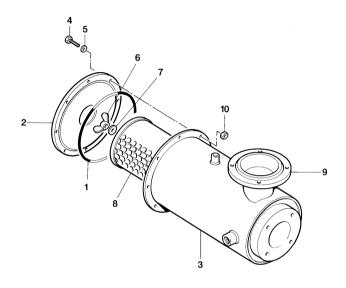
Intake filter, K23, K25, K28 gas compressors
